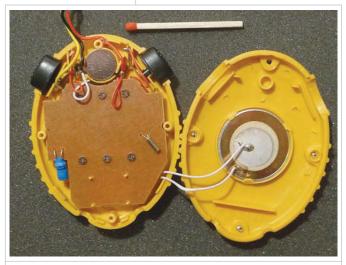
You can solder in pigtails to bring power, ground, and the trigger circuit to the prototype.
